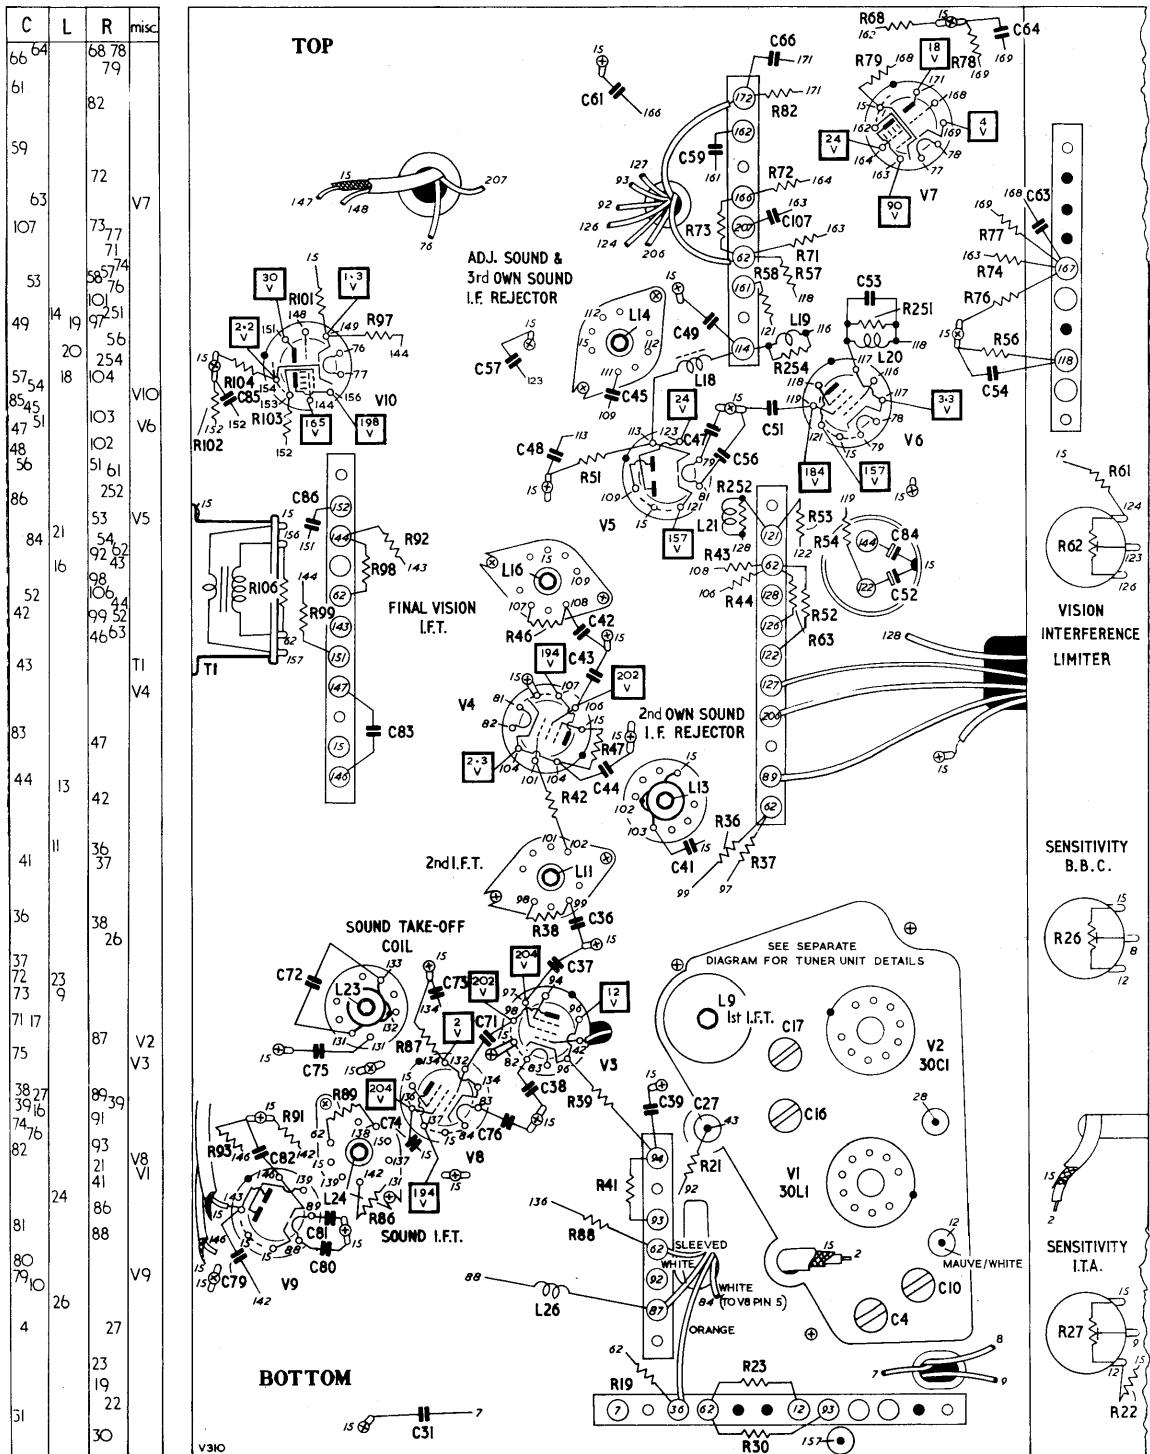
The outer side of the receiver chassis. See page 15 for details of the tuner chassis.
